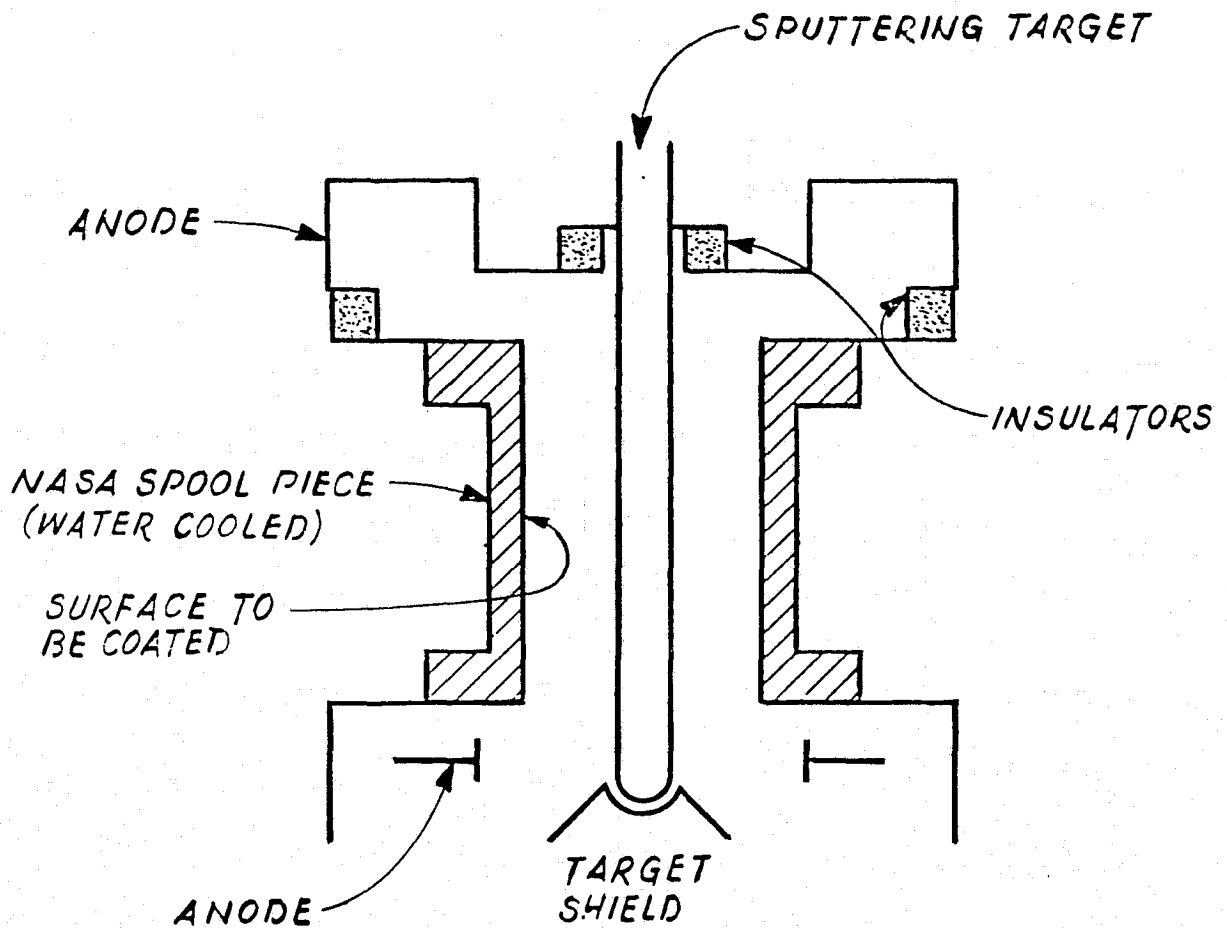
Sputtering Hardware Arrangement for Spool Piece Coating.
